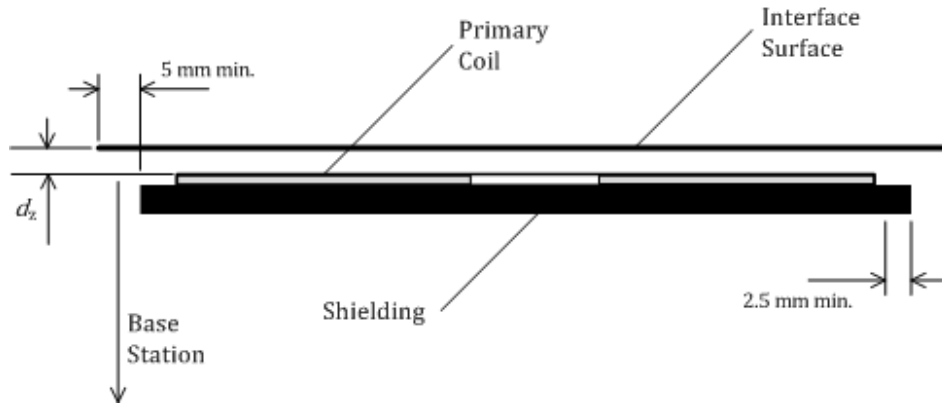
Primary Coil assembly of Power Transmitter design A12
